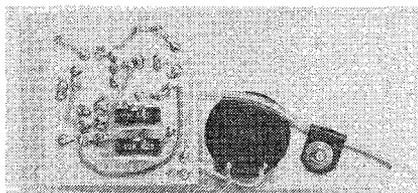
THE SMALL PC BOARD can be secured to the front panel of the cabinet via S1's mounting nut. The board shown here is the author's prototype.
